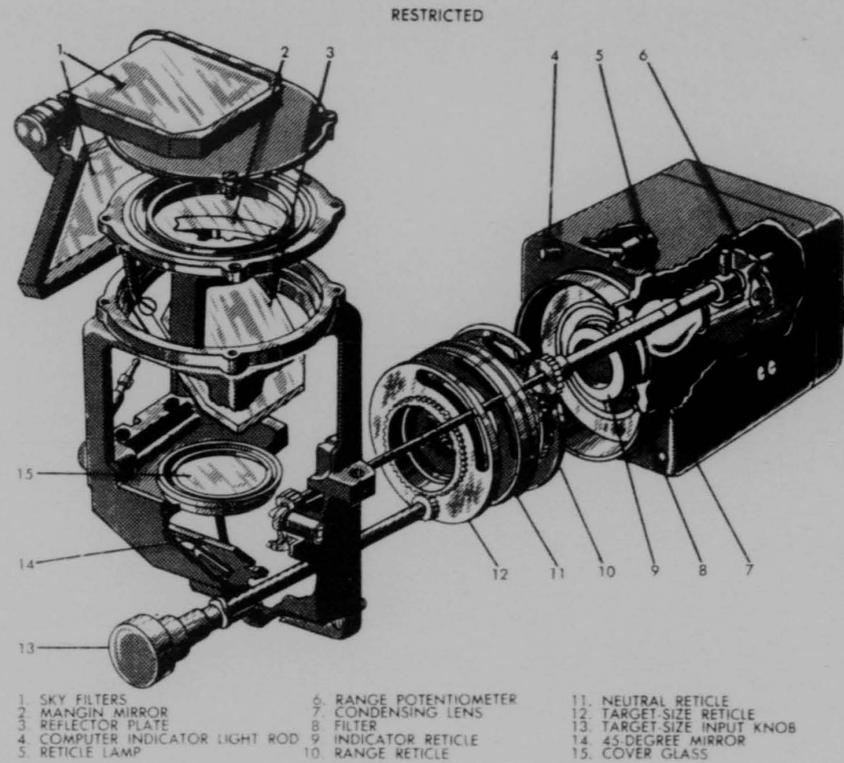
Partially Exploded View of Retiflector Sight Showing the Range and the Target-Size Input Gear Arrangement.
